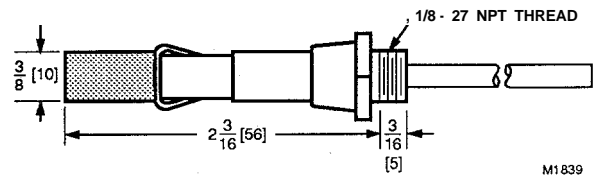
Dimensions in inches [mm] of C7009A flame rod assembly.
